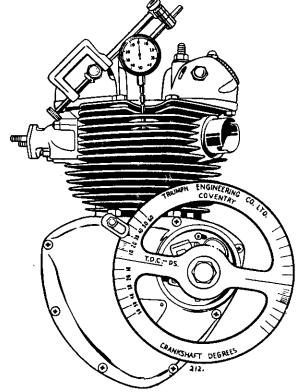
FIG. A. DIAL TEST INDICATOR AND DEGREE LIMING DISC ARRANGEMENT
